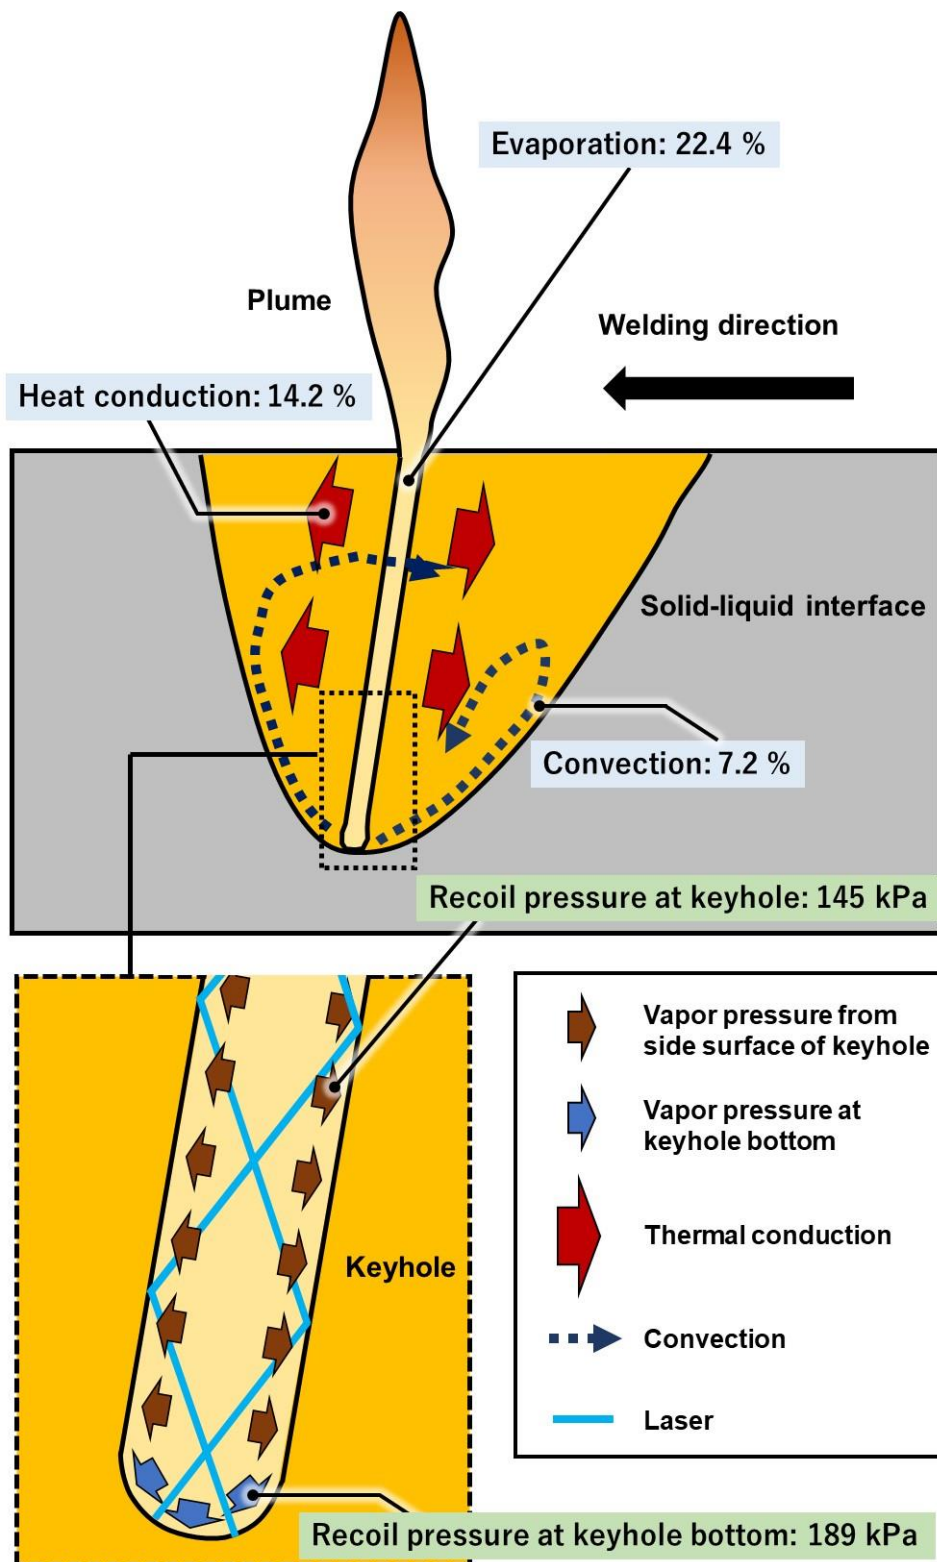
Heat transportation model in laser welding with Al alloy.
